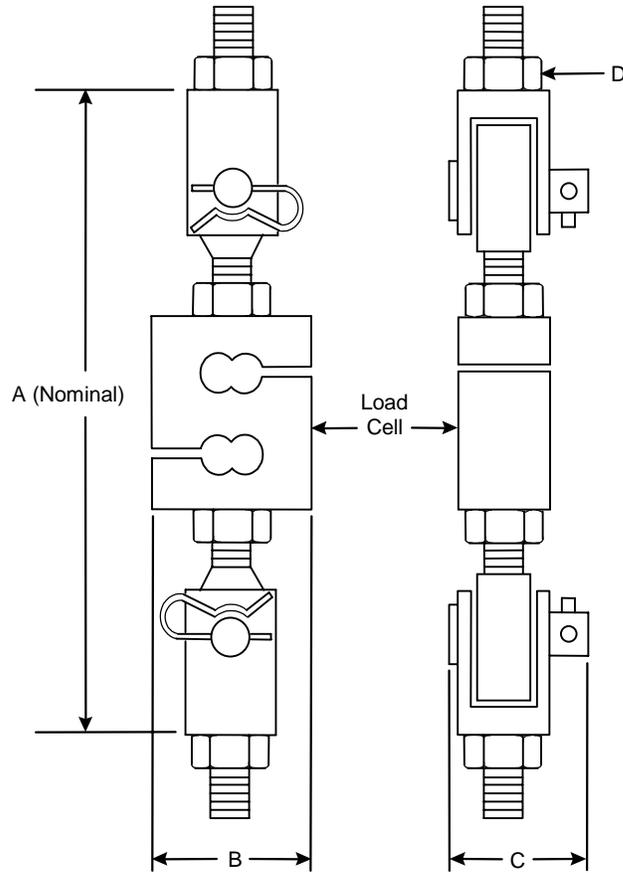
Model 0972 Ultramount Weigh Module Dimensions
